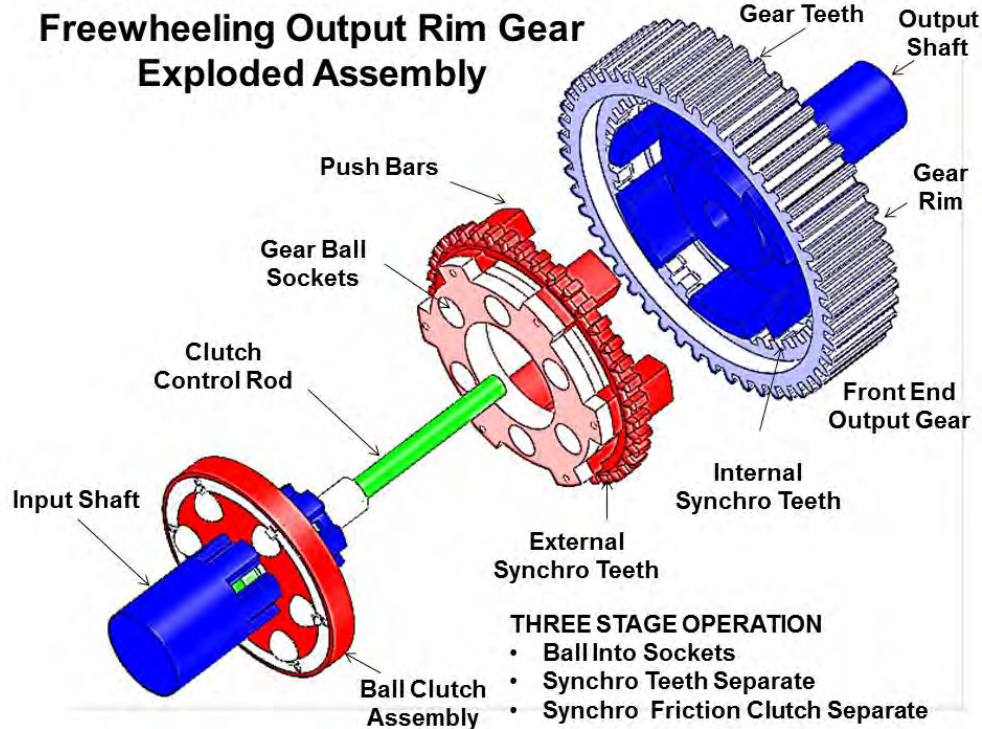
Exploded view of the synchro mesh clutch assembly
